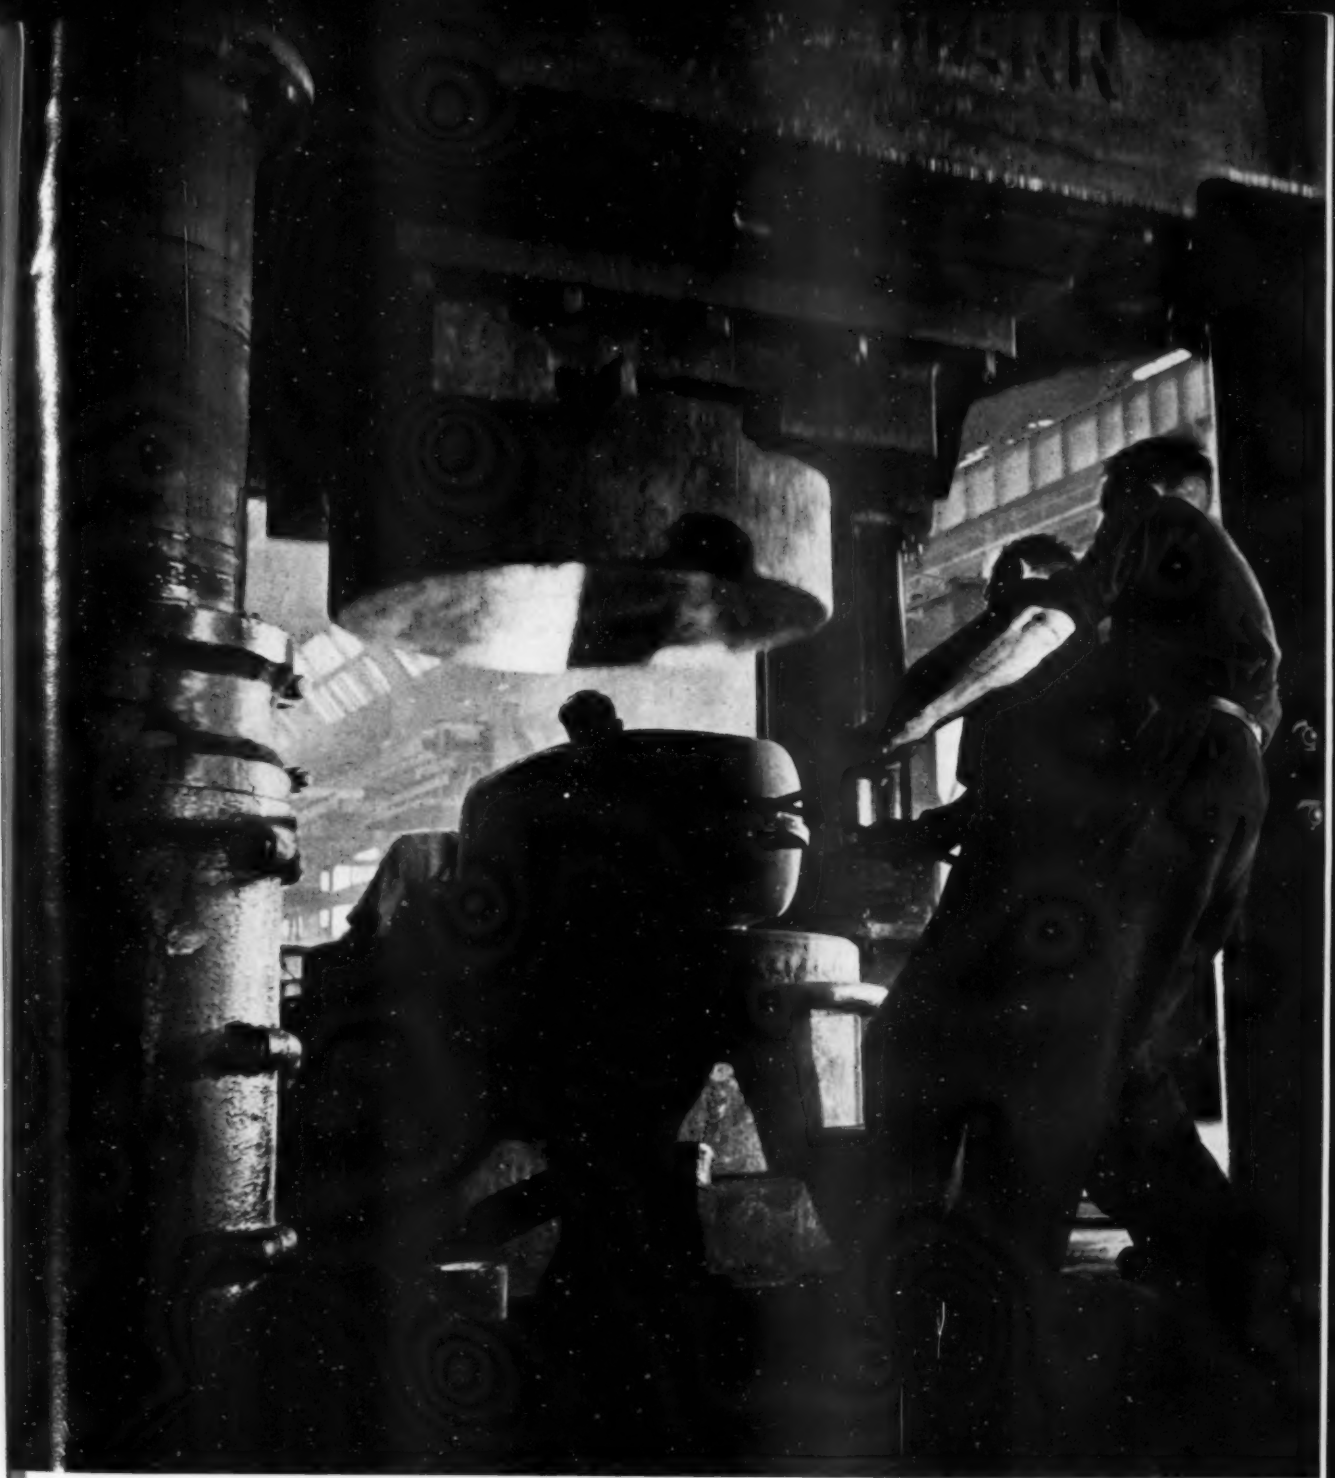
Open die forging of a large ingot of cast material which is being broken down to give a forging of high mechanical properties.
